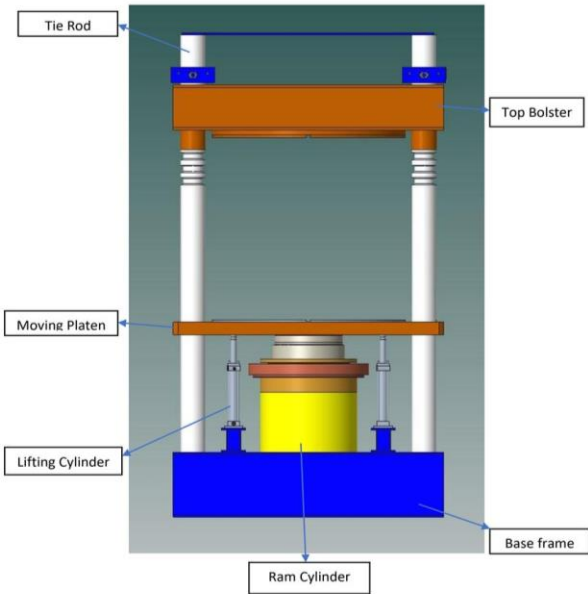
Typical Large Scale CTM with Jack, Base Frame and Top Bolster Arrangements. It can also have
